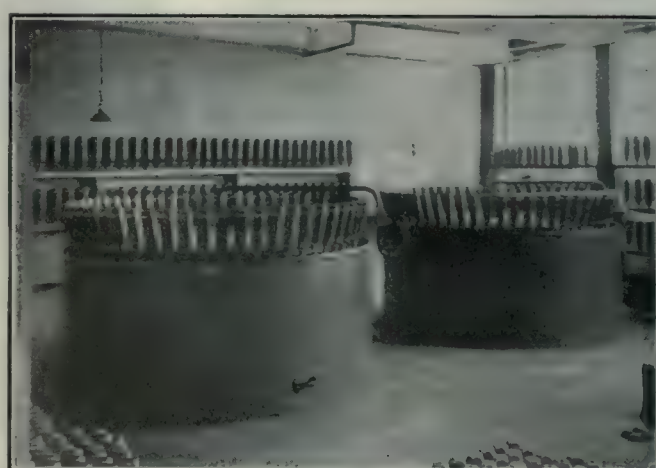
TWO PAINTING MACHINES OF CANADIAN LOCOMOTIVE CO. MAKE.
